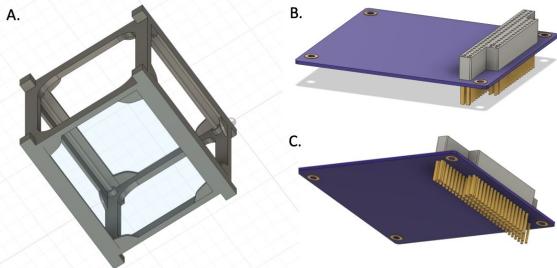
A. chassis structure B. top view of PCB C. bottom view of PCB
